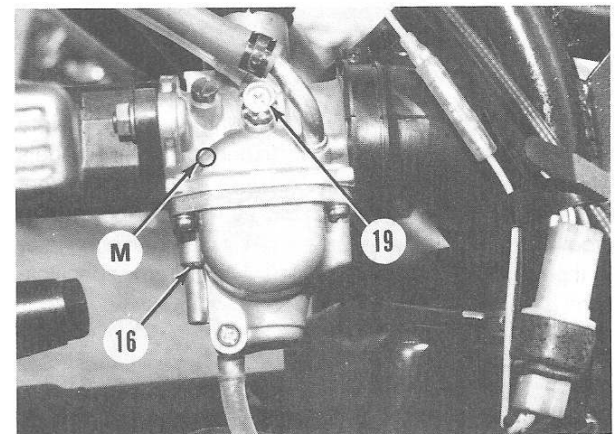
View showing location of idle speed screw (19). The idle mixture screw is located at (16) or at (M).
